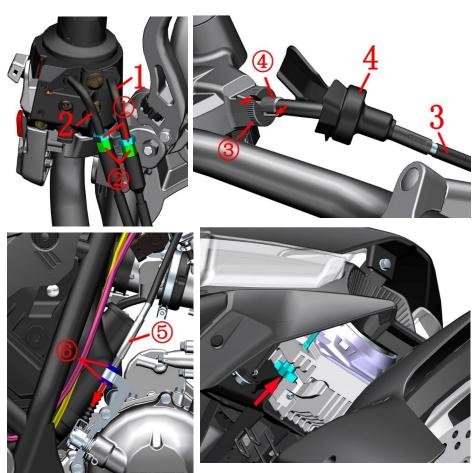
FRONT FORK		Throttle/clutch cable gap adjustment, high light	CHK	Q
